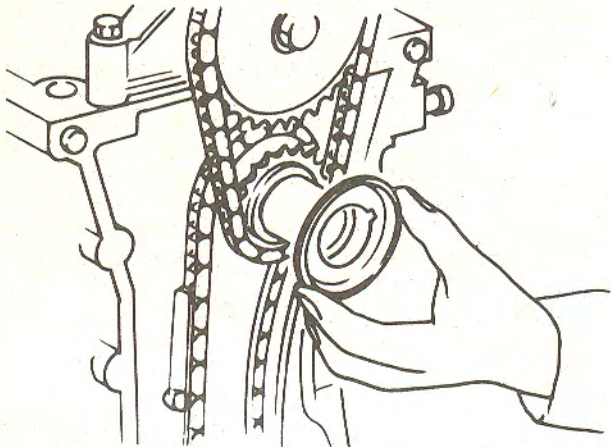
Fitting the oil deflector in front of the timing sprocket. The up-turned edge is towards the outside.
